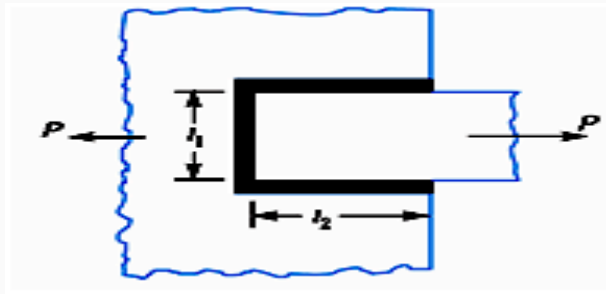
Combination of Transverse & Parallel Fillet Weld
